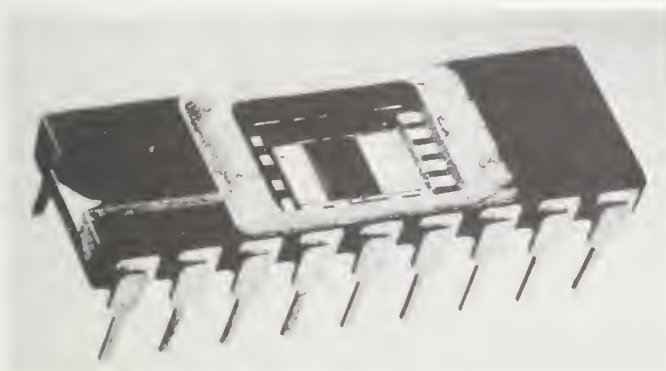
INTERDIGITATED SENSOR LASER MACHINED ON THE BOTTOM OF A HERMETIC PACKAGE.
